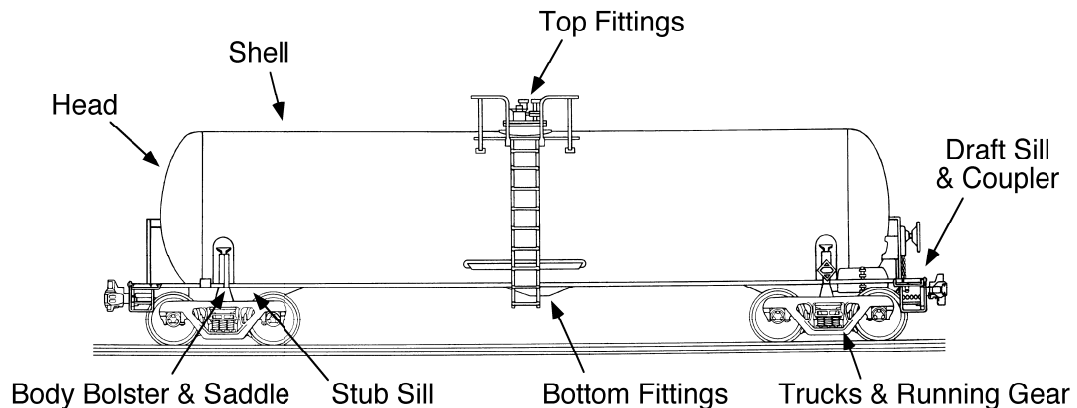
Diagram of a typical non-jacketed North American railroad non-pressure tank car
